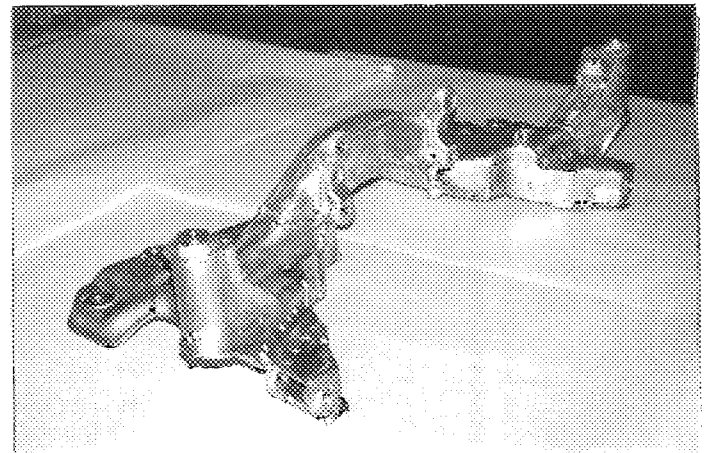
HEAVY DUTY TOP MOUNT ... FRONT
